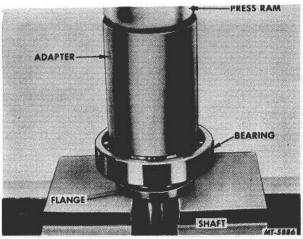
Installing Injection Pump Drive Shaft Front Bearing
